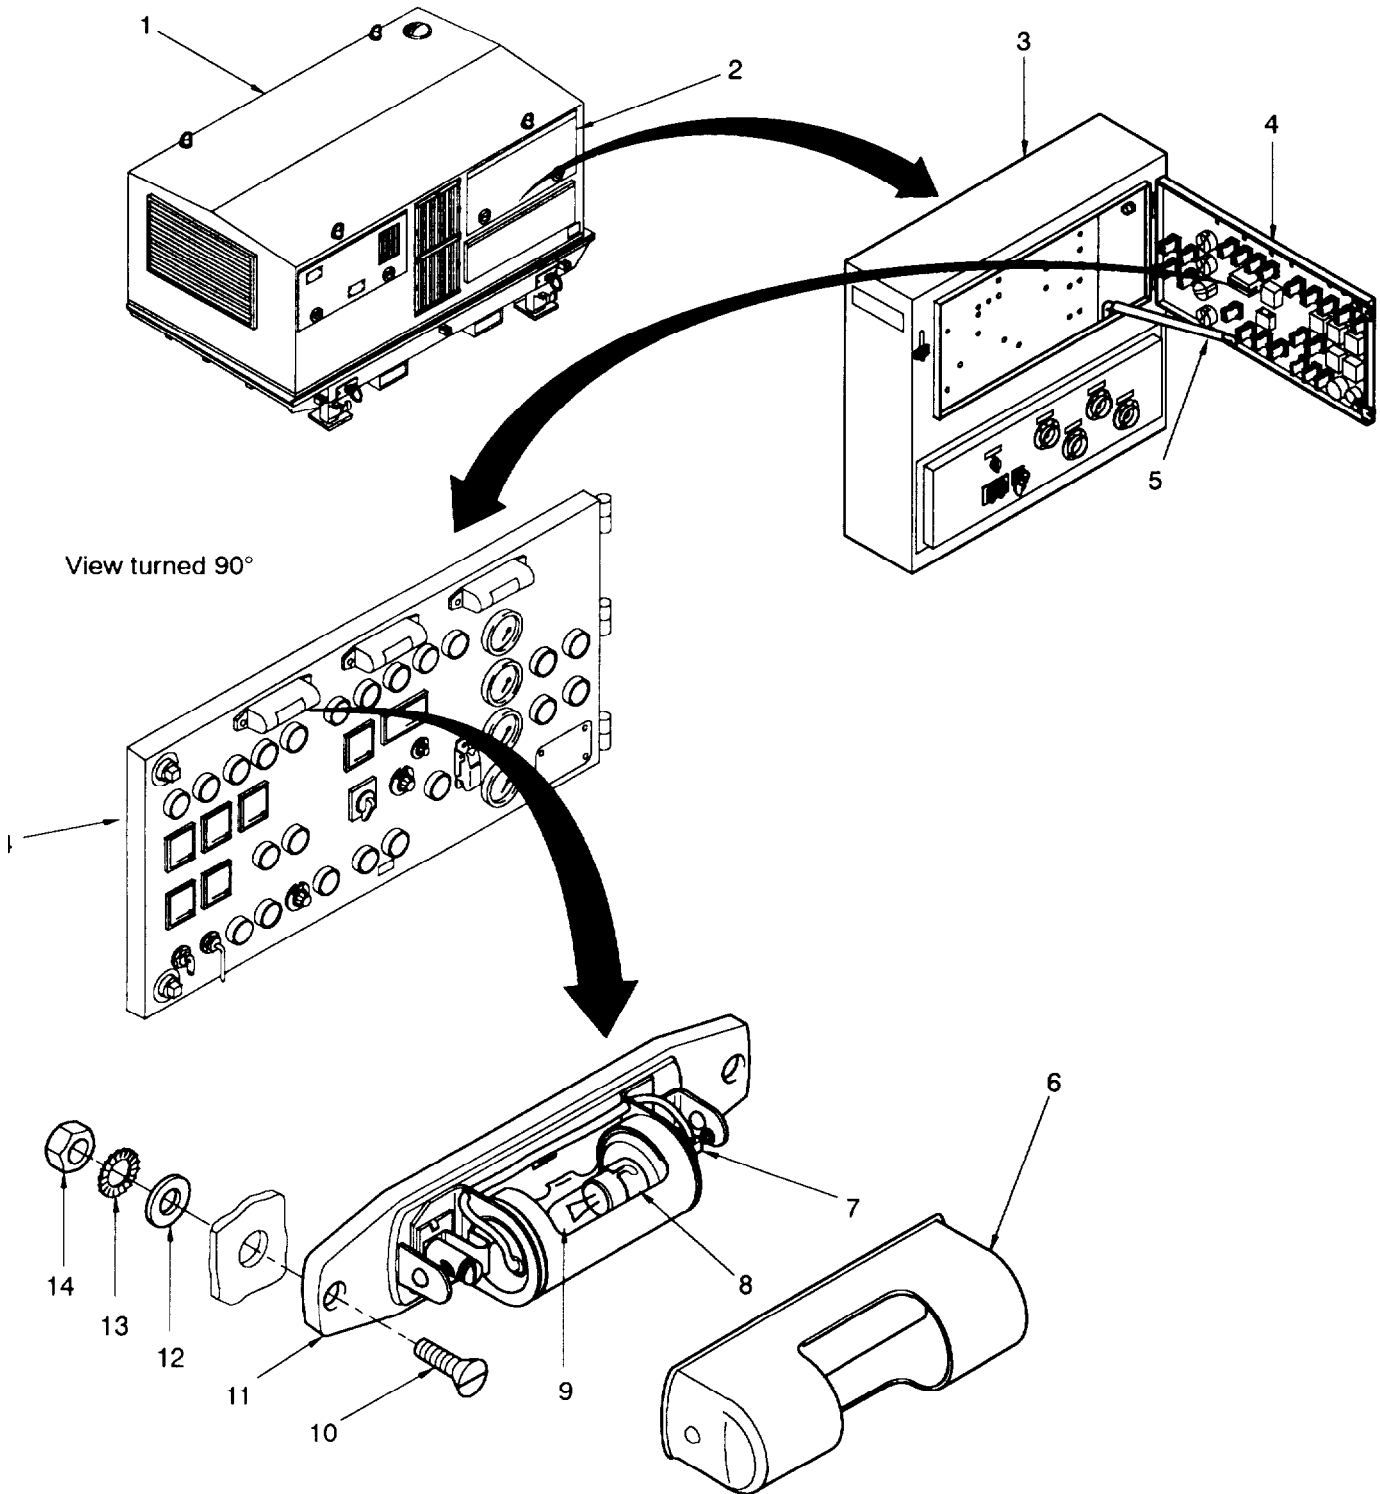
Control Cabinet Assembly, Panel Illumination H6 Maintenance.
